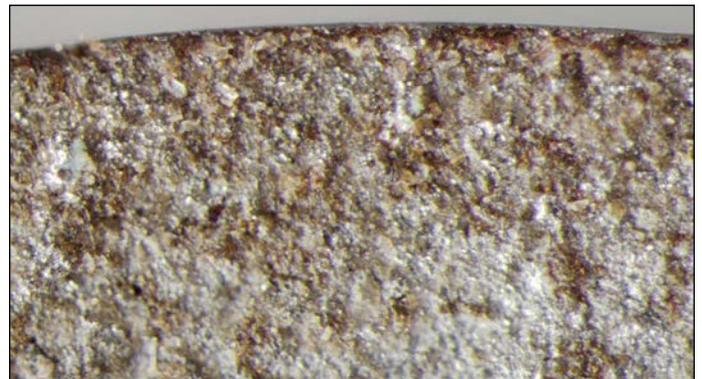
Fracture section of case hardened CrMo steel bar specimen, after endurance test.
